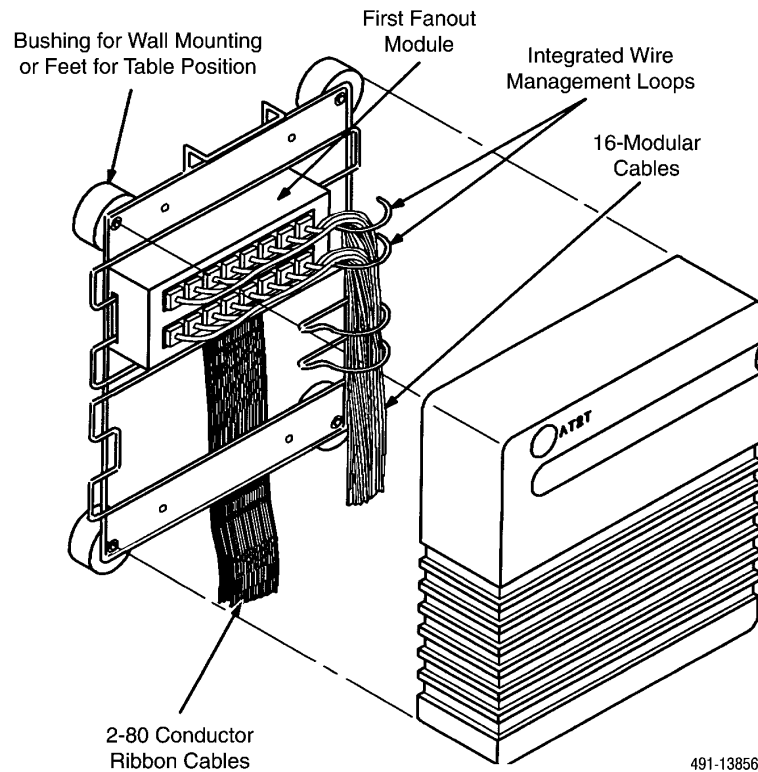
IPC-1600 Ports Cabinet Assembly
